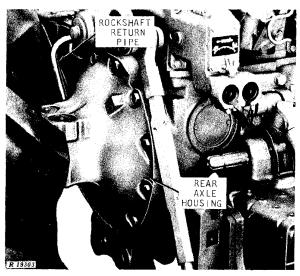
Rear Axle Housing (Sound-Gard Body removed tor illustration purposes)
